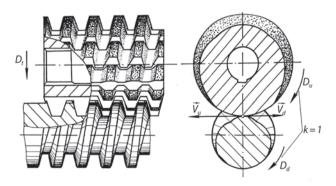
Thread cutting by a helical tool synchronously rotated with the workpiece
